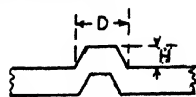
(right).—SHAPE OF PROJECTIONS ADVISED FOR THICK SHEET
